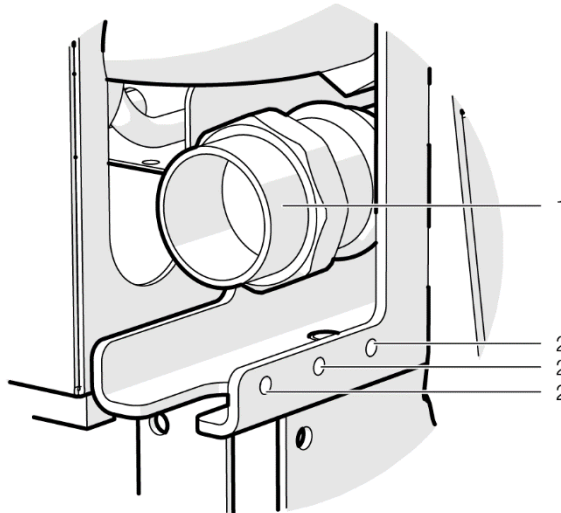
Fastening point of the assembly foot (unit lying flat)
